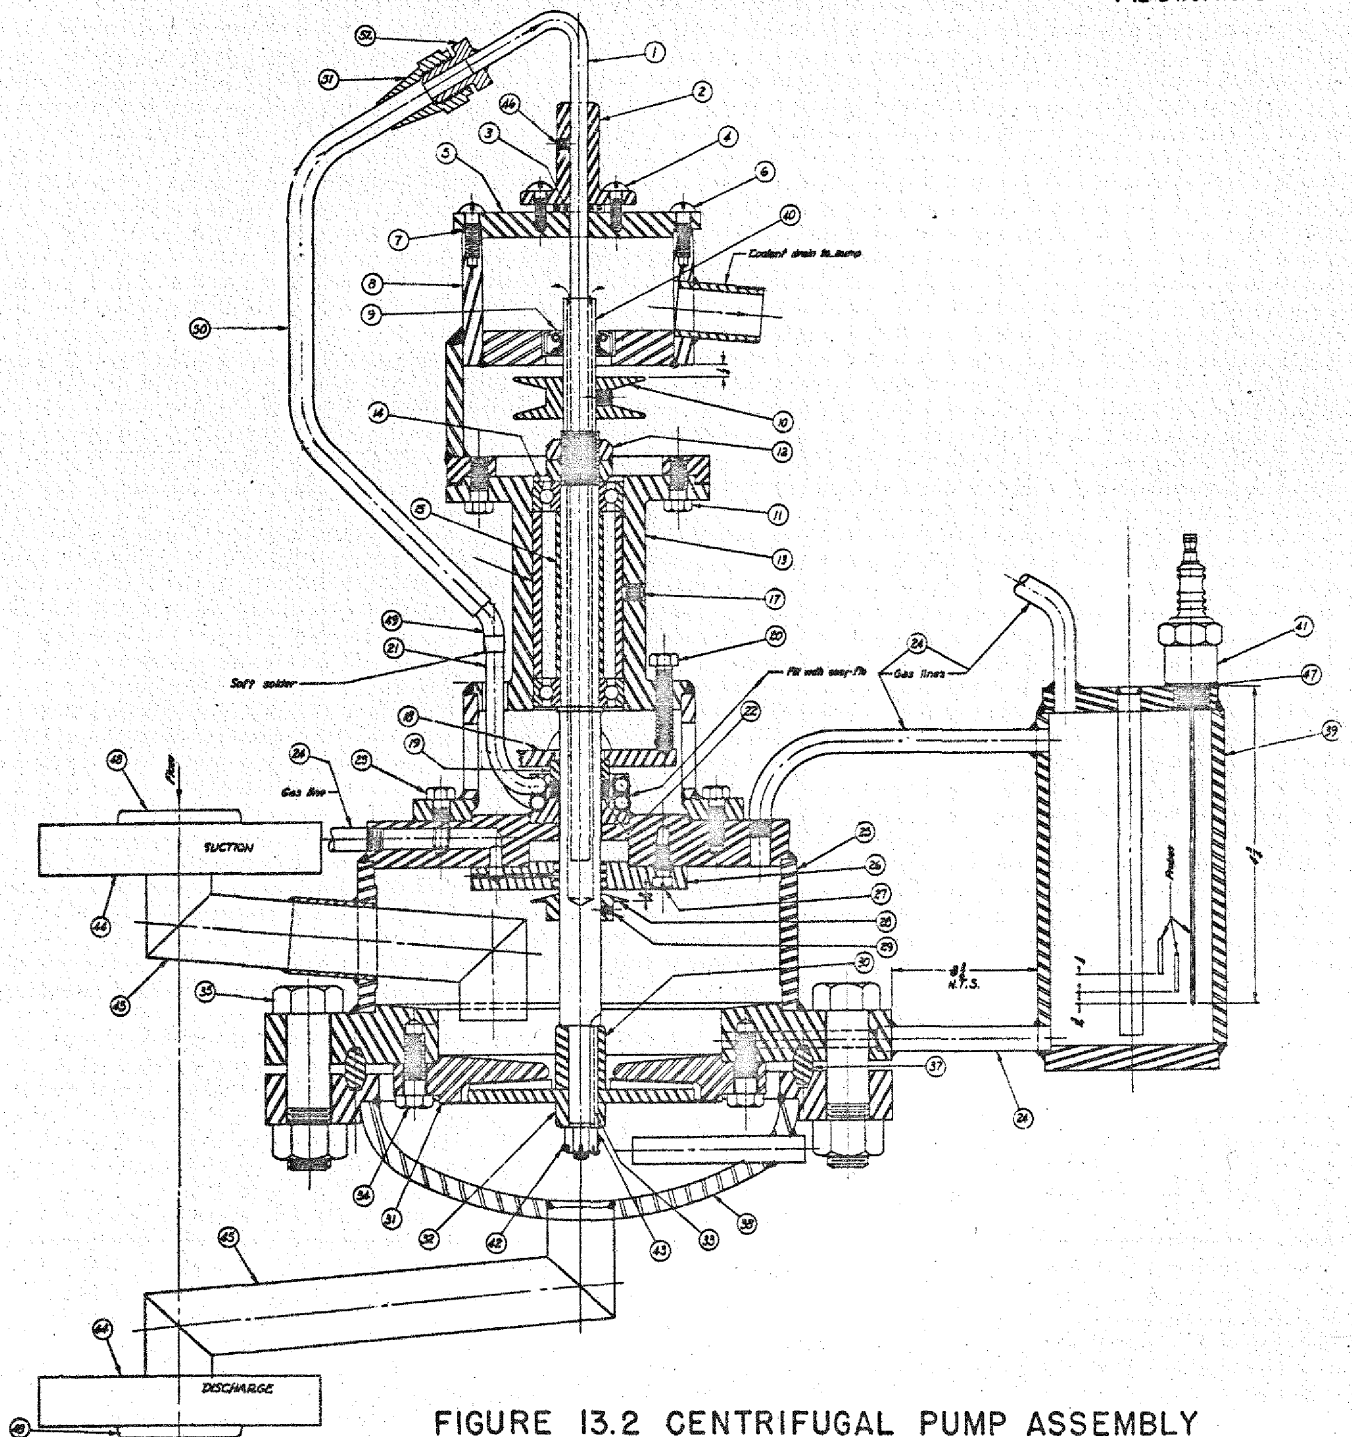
CENTRIFUGAL PUMP ASSEMBLY
